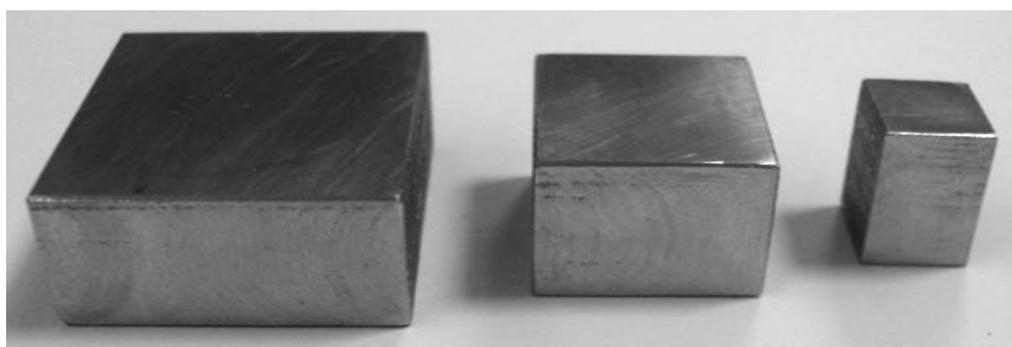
Photo of the three cuboids after they were machined on all surfaces
